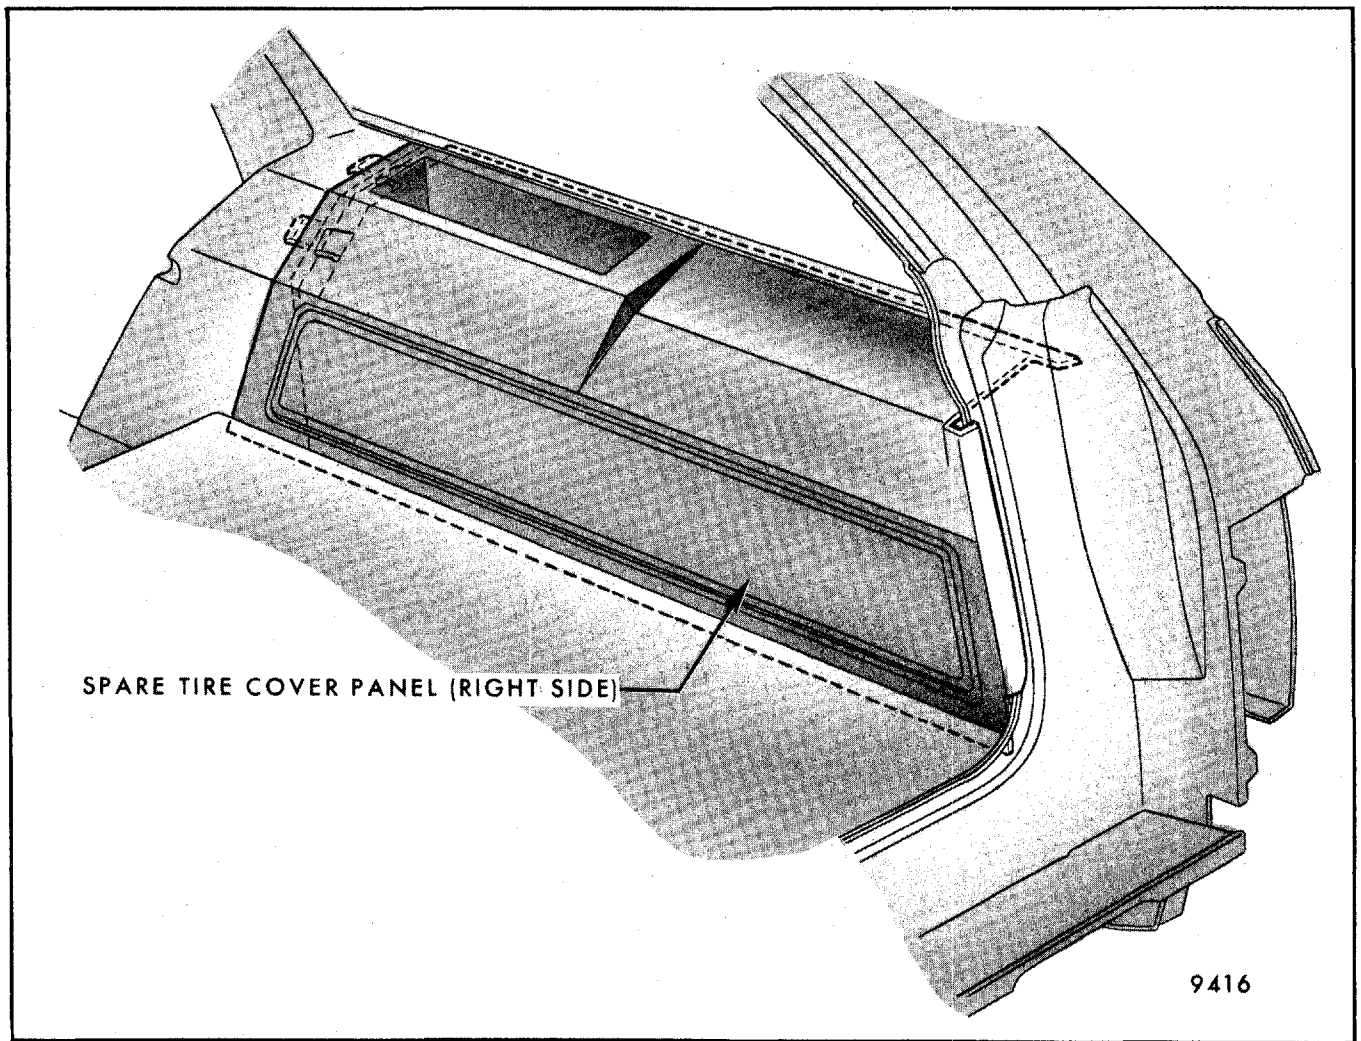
Wheelhouse and Spare Tire Trim Cover Panel "B-35" Styles
